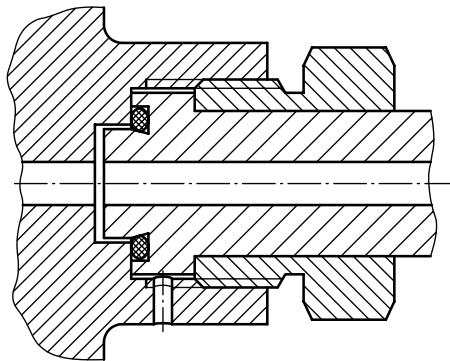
232 bar gas withdrawal connection — Assembly drawing
